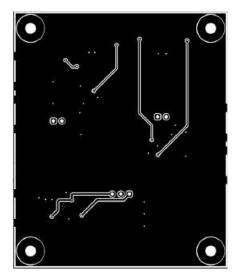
PCB Layout Example From LMK6 EVM - Bottom Layer
